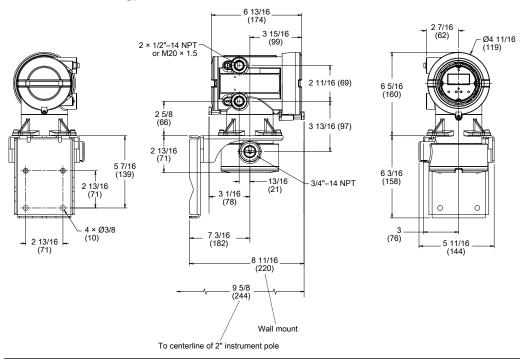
4-wire remote mount transmitter dimensions (painted aluminum housing)
